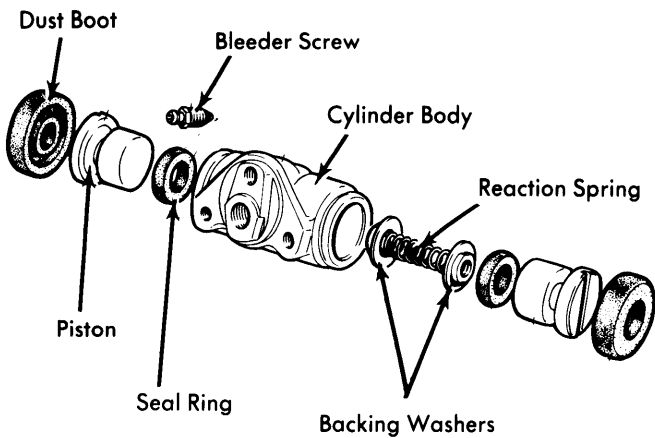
Fiat Rear Wheel Cylinder Assembly
